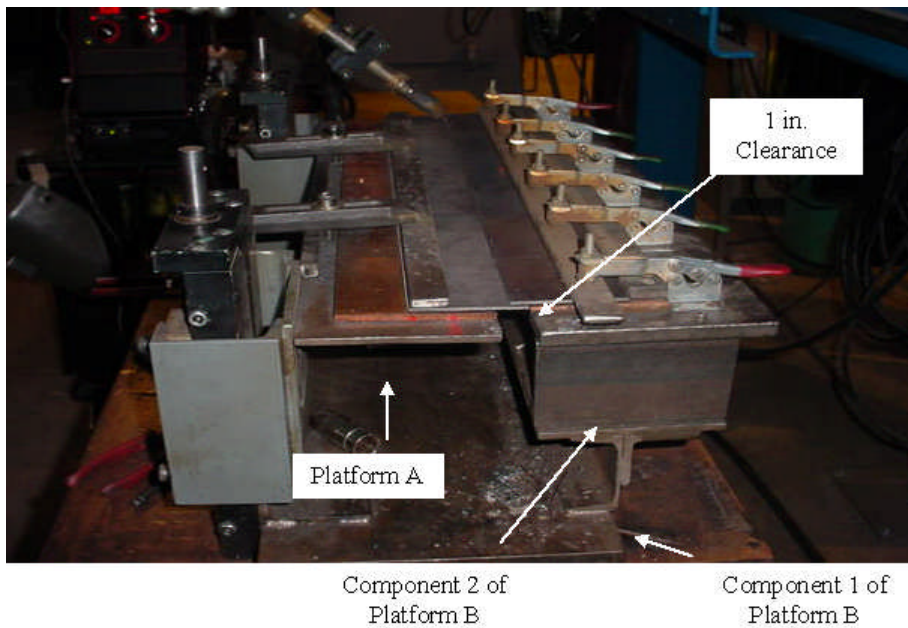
Assembled Variable Joint Gap Weldability Fixture
